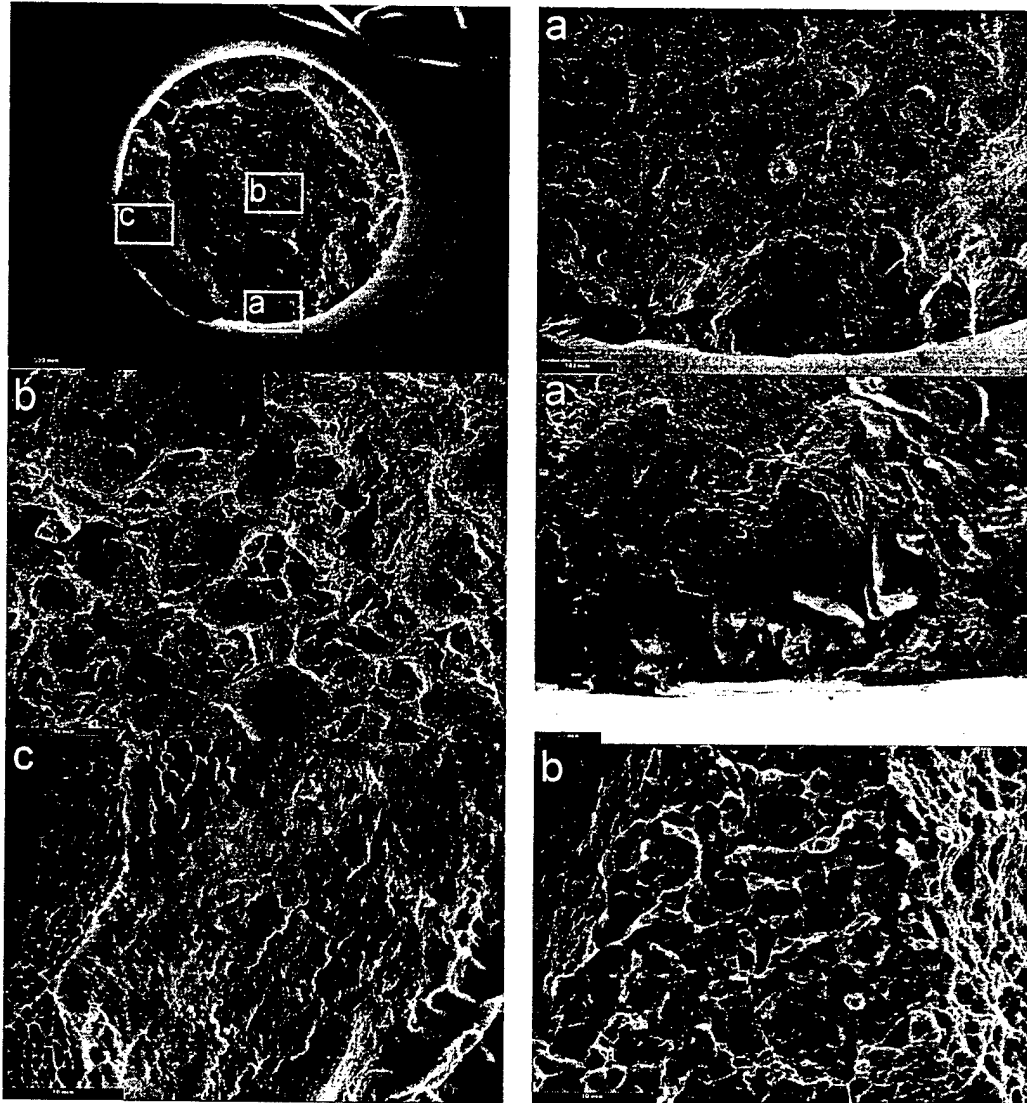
Fracture surface of VT22 in RR condition #13 (table 12, aging at 640°C, 8h, heating rate to aging temperature 0.16 Ks⁻¹).
